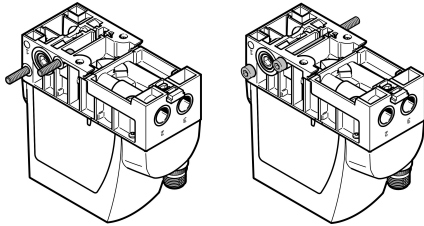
Mounting via side with internal M4 screws/M4 through screws
